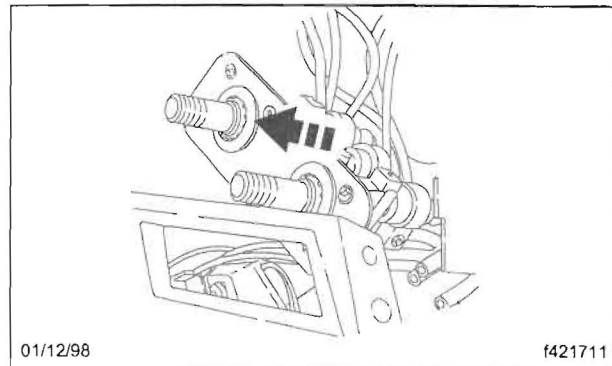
, Trailer Air Supply Control Valve Retaining Screws
